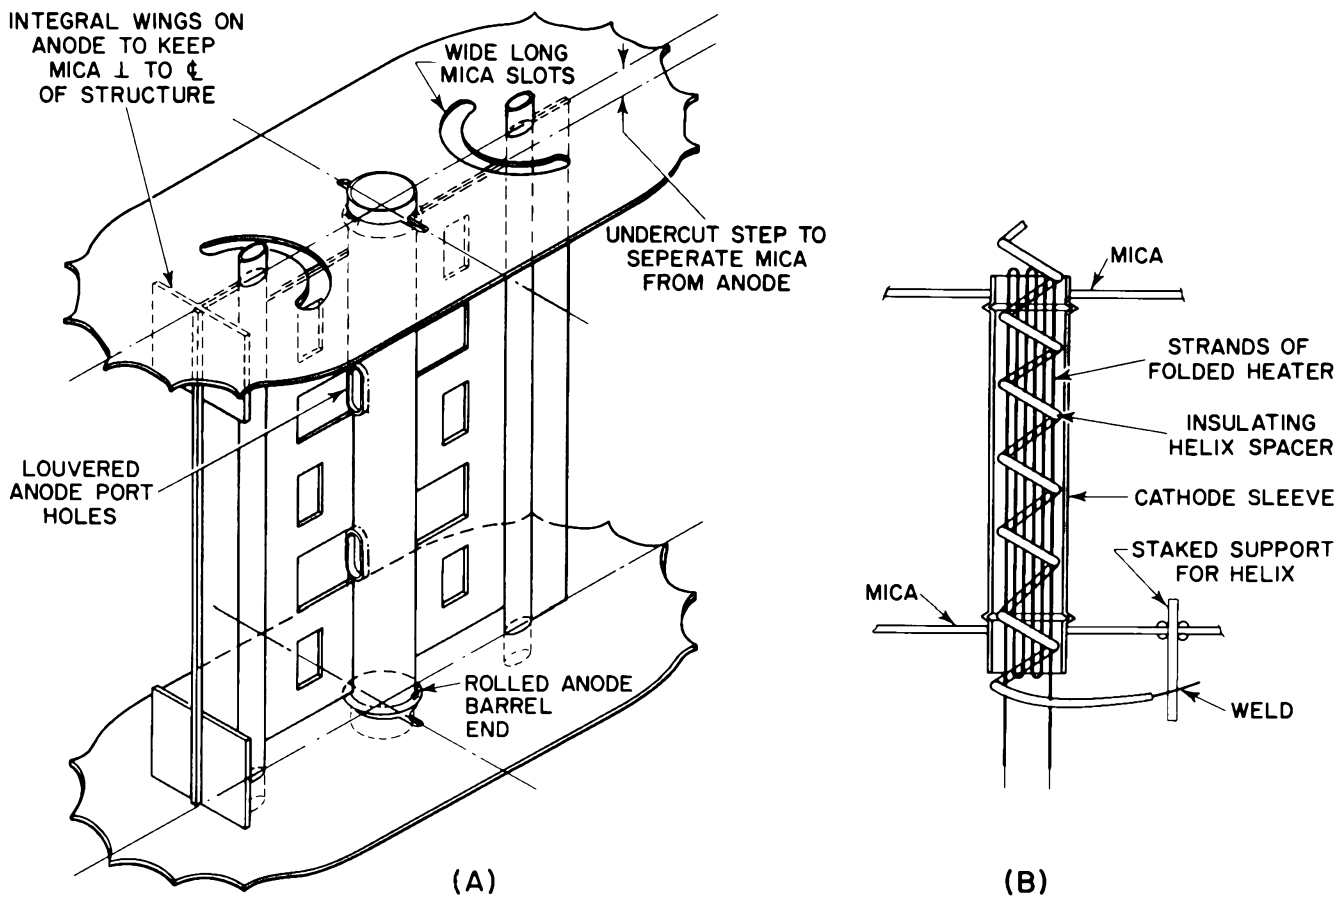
Constructional Details of Damper Diode (6DE4 and 6AU4-GTA): (A) plate and mica assembly, (B) cutaway cathode showing position of helix-insulating spacer and heater
